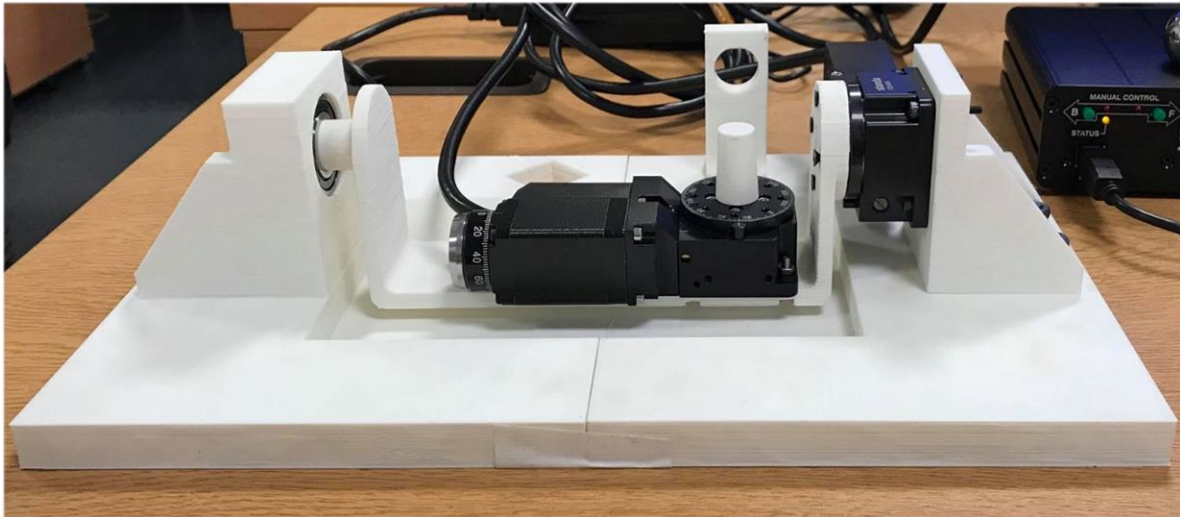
3D printed prototype of the fixture system using the Standa rotary stages.
